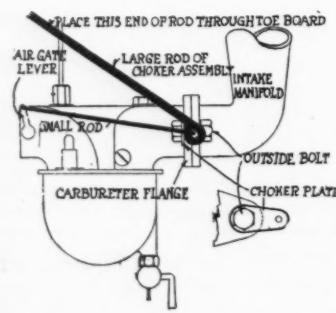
Choker assembly for Heinze-Springfield installation on Ford car
